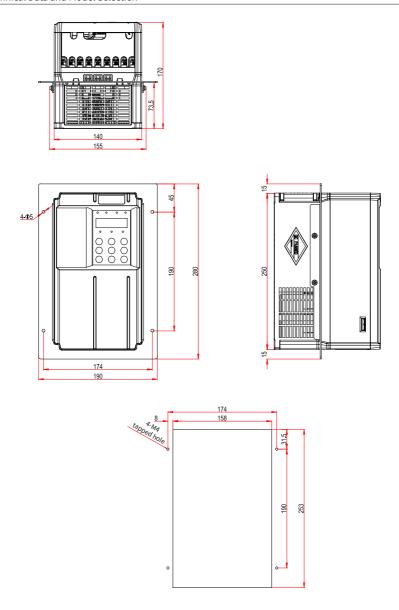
Mounting bracket dimensions and hole spacing for 7.5–11 kW AC drive models
